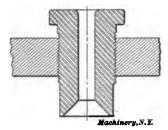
Screw Bushing used for Locating Round Work by means of a Conical Recess
